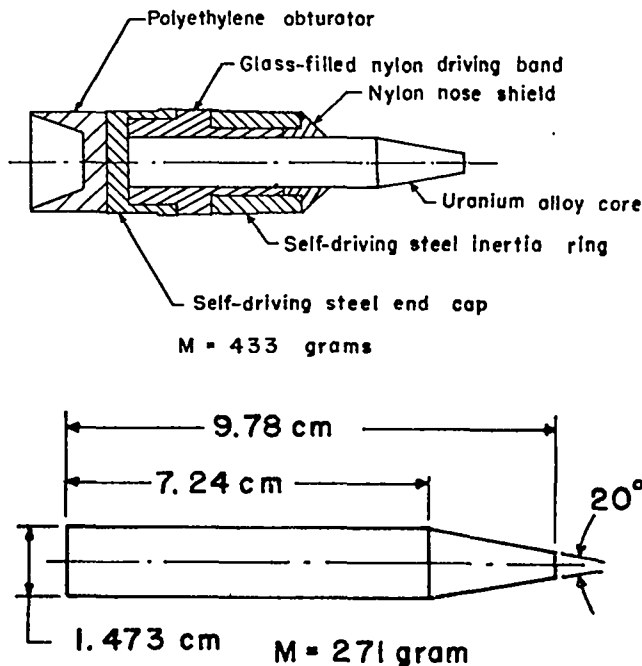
The 30-mm test projectile and uranium penetrator core.
